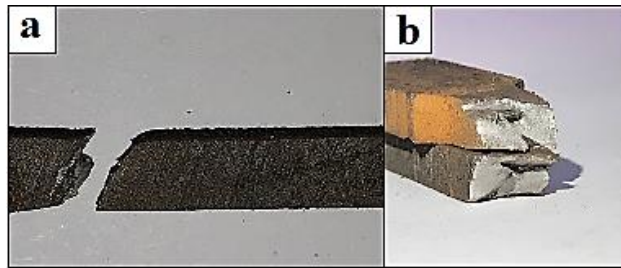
Fracture of one of the A4 tensile test specimens (a): fracture mode (b): cross-section of fracture.
